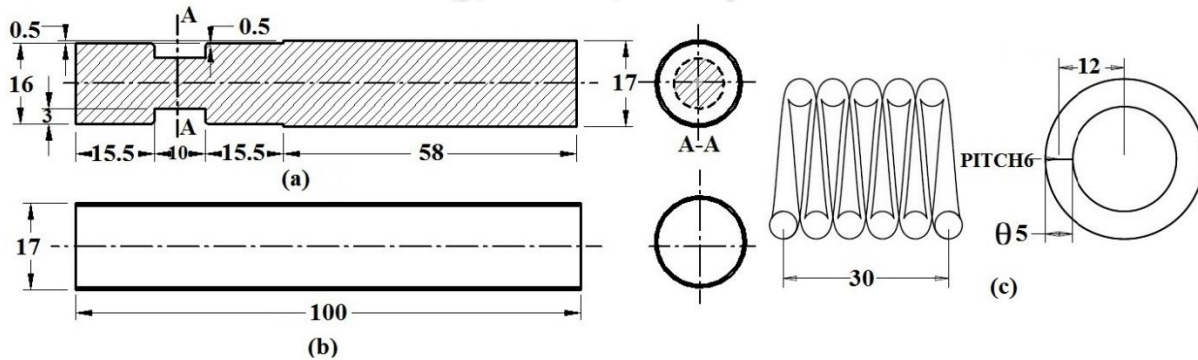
Dimension of (a) rod (b) aluminum tube and (c) coil (All dimensions are in mm)
